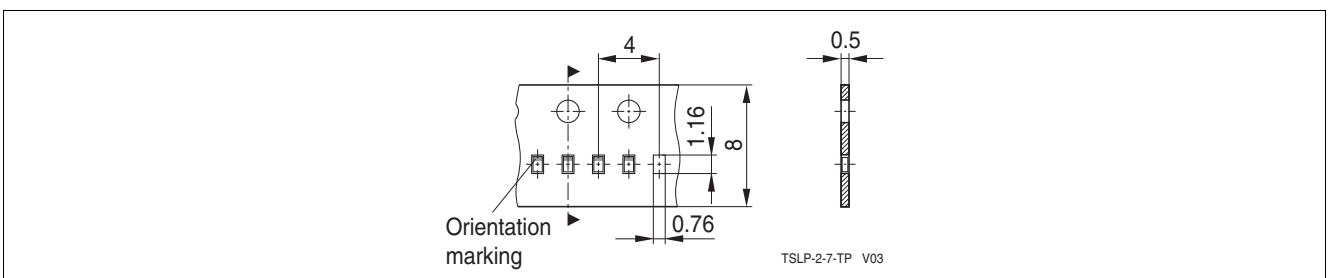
TSLP-2-17 Packing (dimension in mm)
